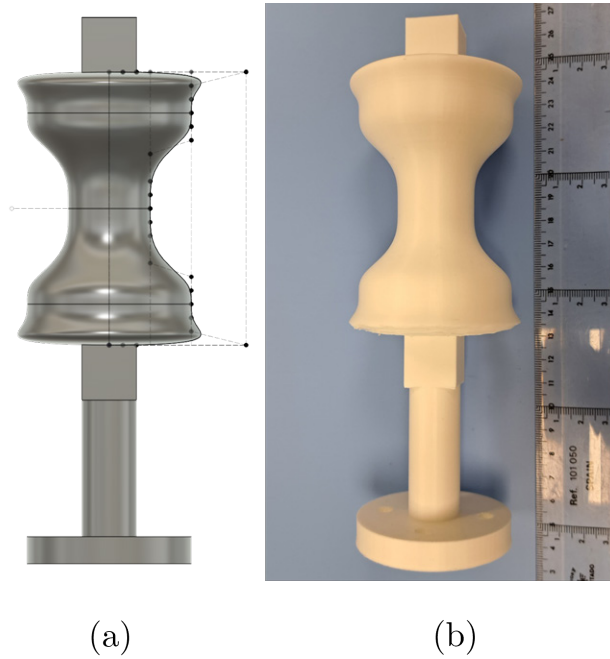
Hourglass-shaped build platform. (a) CAD model. (b) Actual part.
